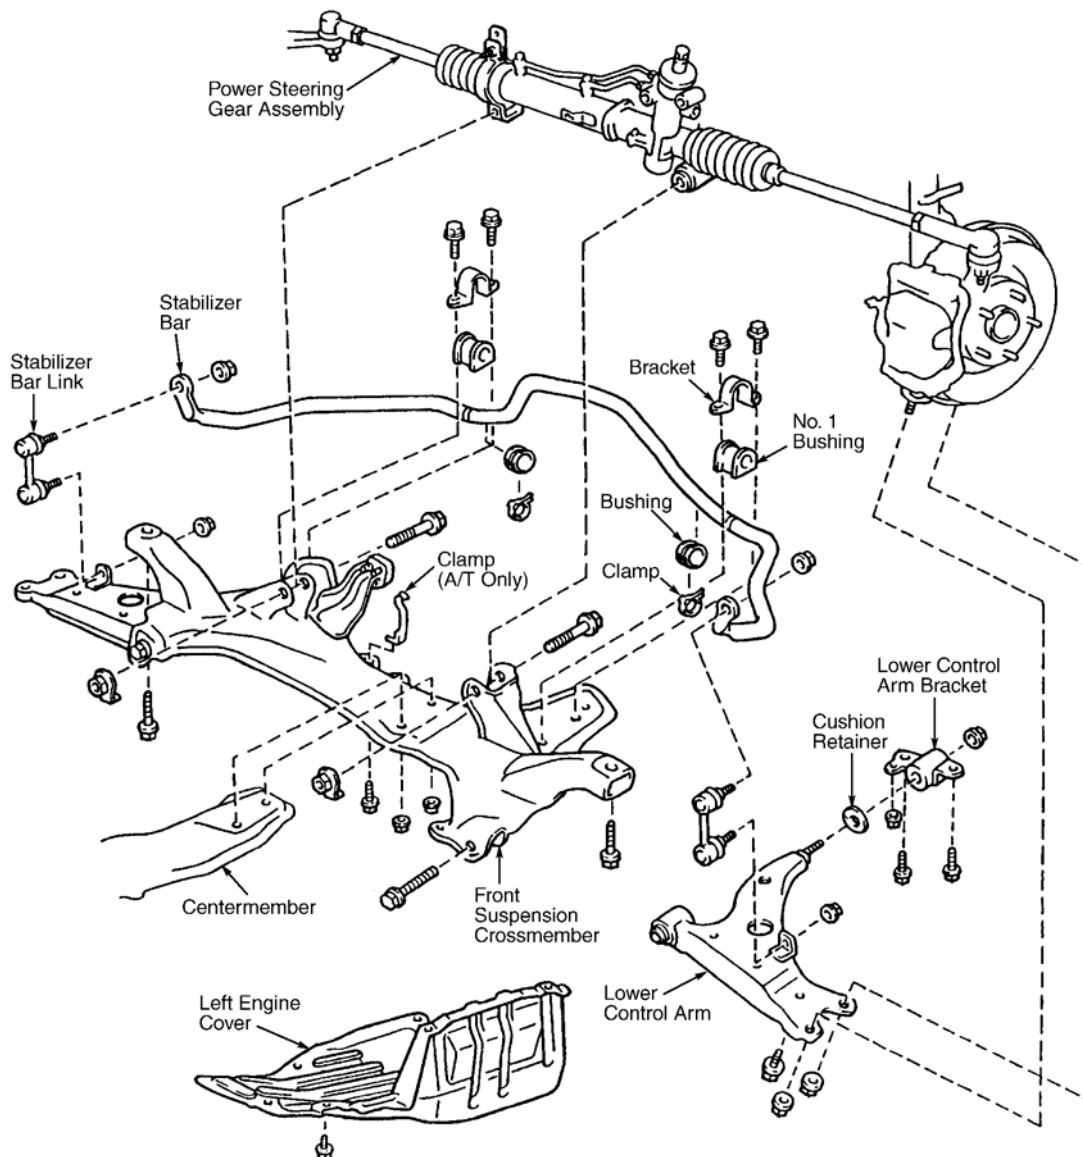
Exploded View Of Lower Control Arm & Related Components (RAV4)
